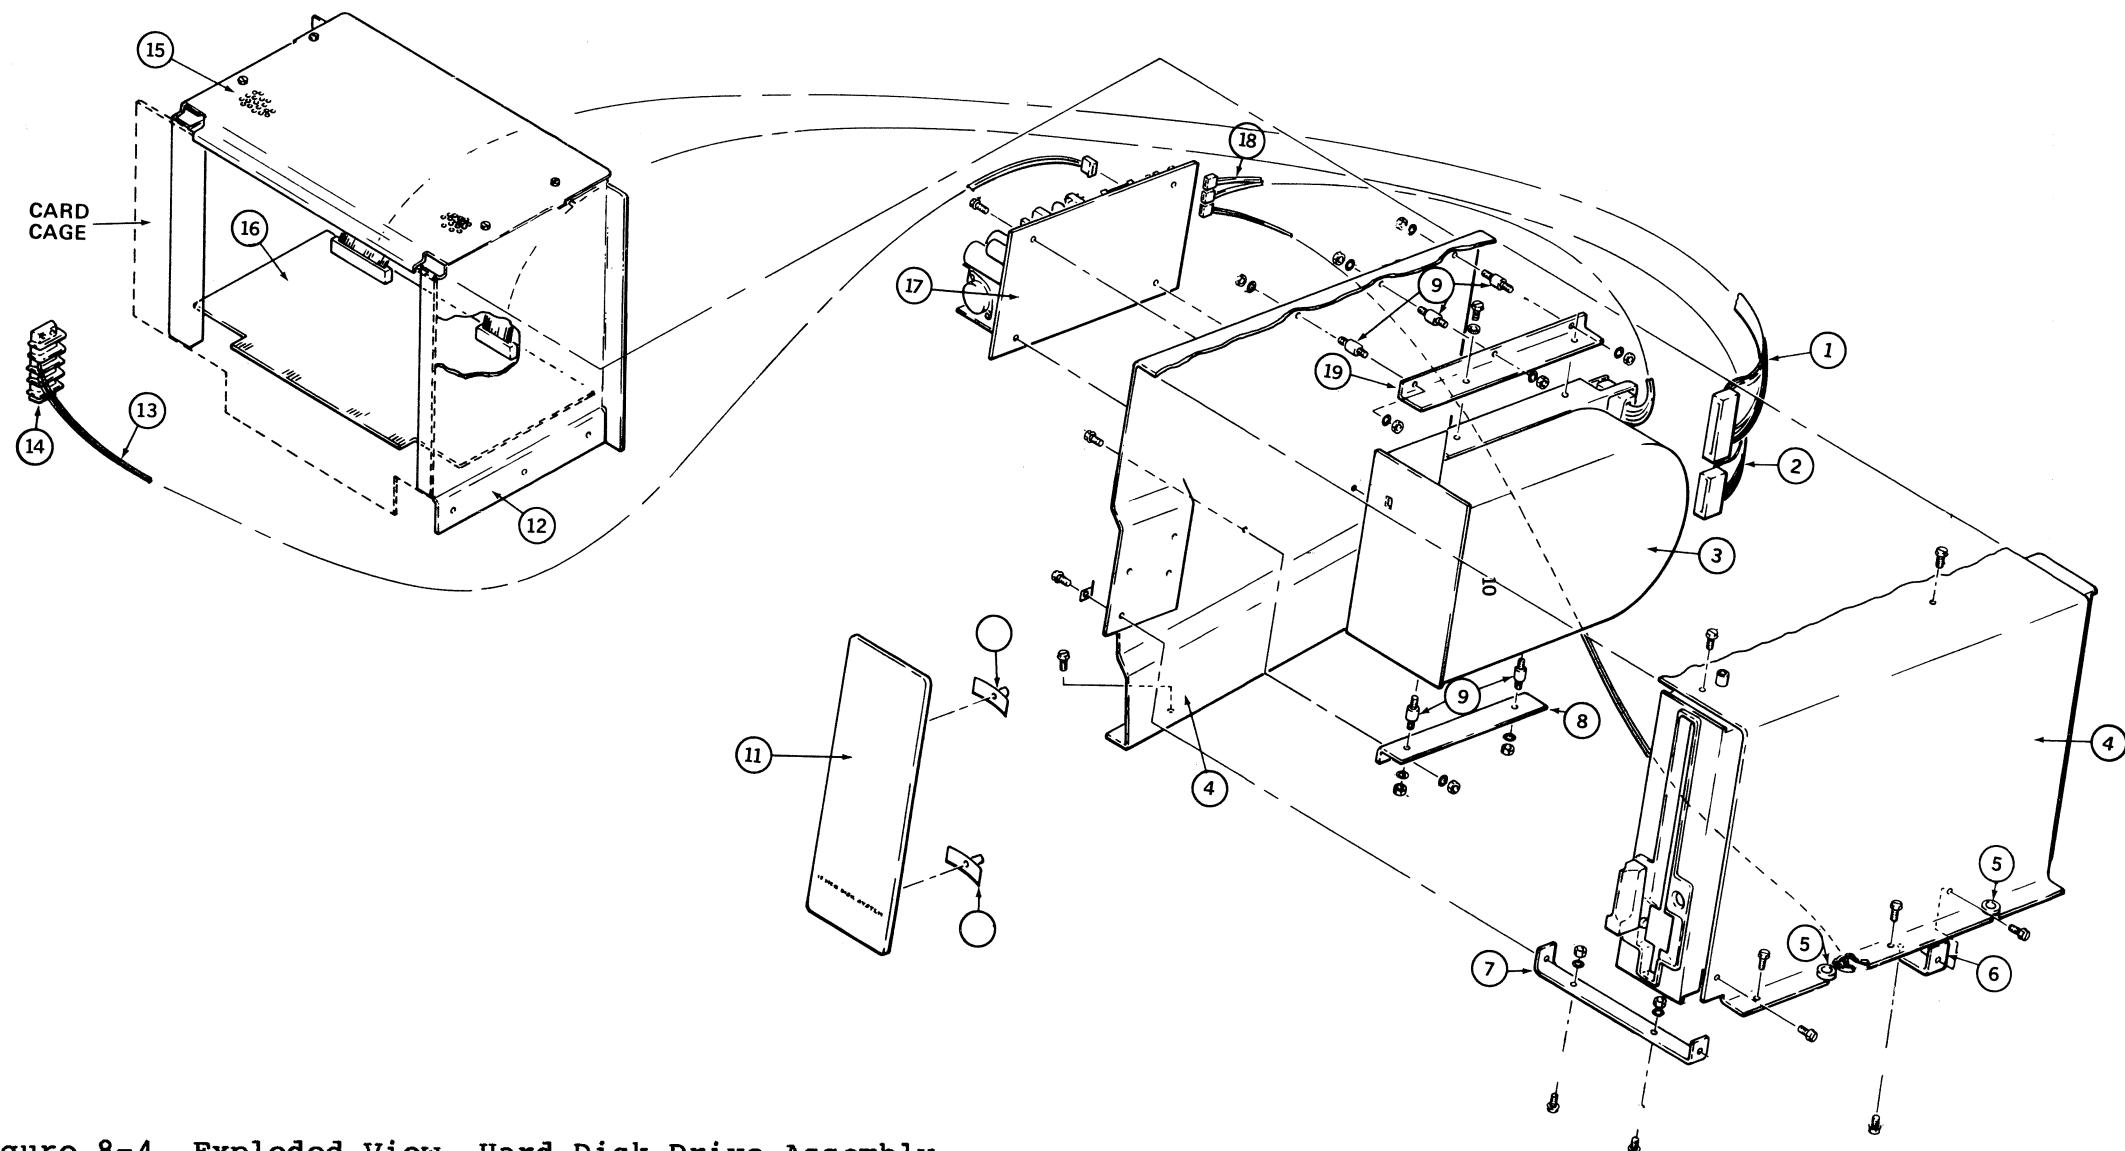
Exploded View, Hard Disk Drive Assembly
